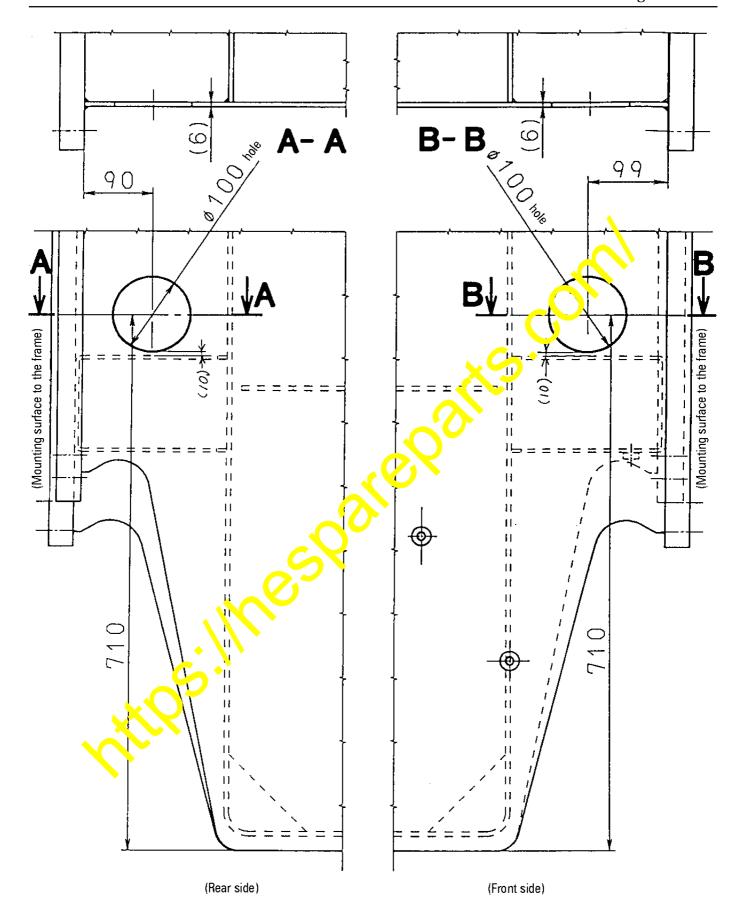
Reworking the end plates (to supplement sand discharging holes)
